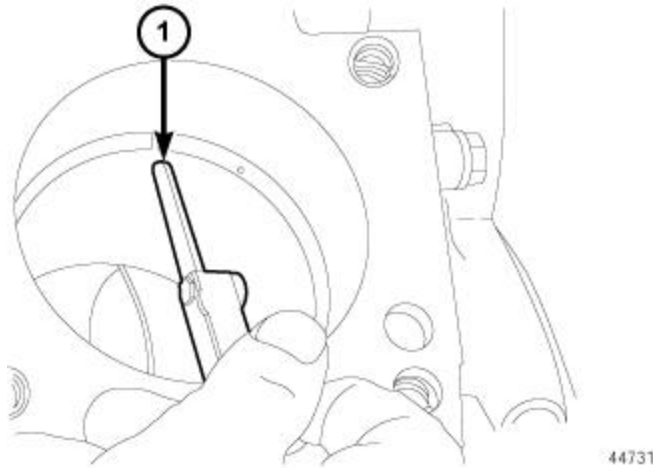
Checking Piston Ring End Gap Using Feeler Gauge
